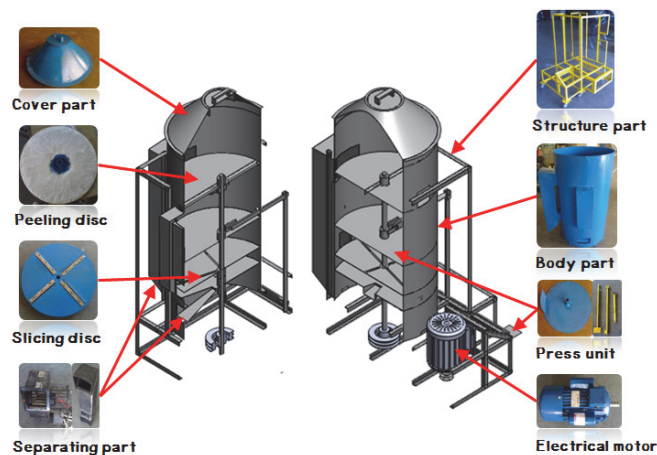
Drawing of peeling and size reducing machine for jackfruit seed
